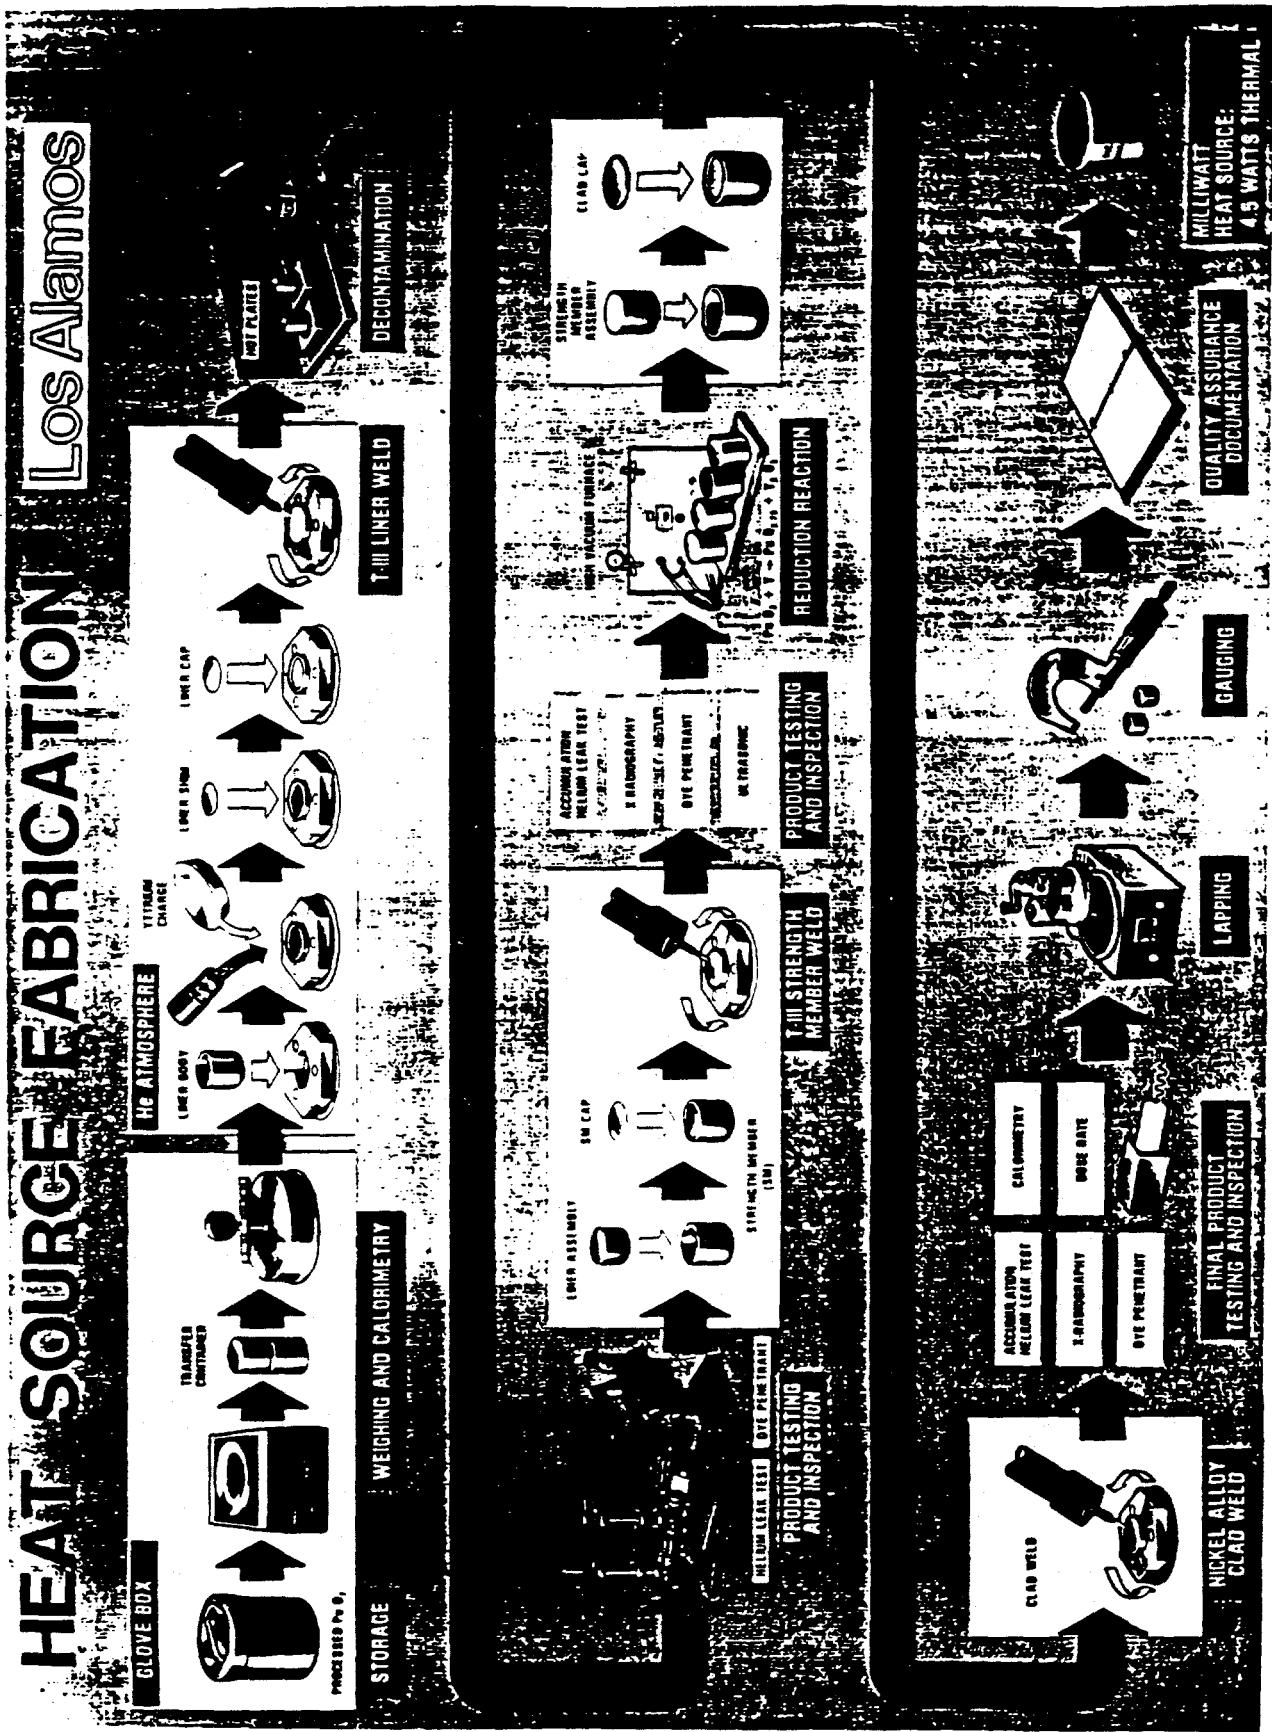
Milliwatt Heat Source Fuel Processing cont.
